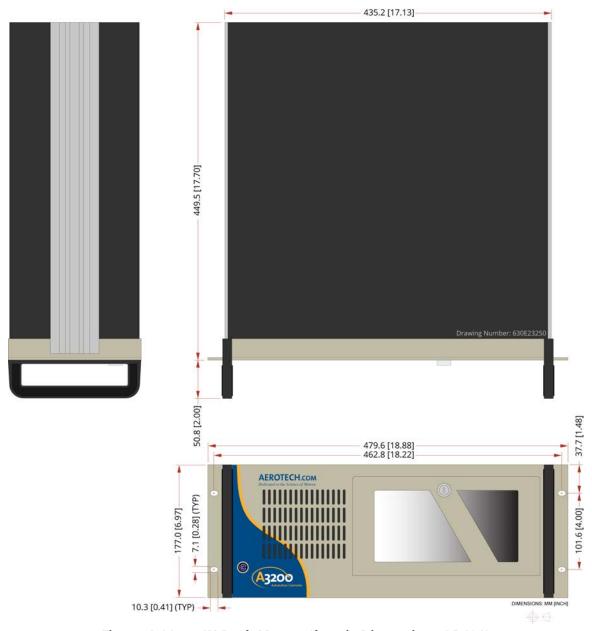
4U Rack Mount Chassis Dimensions (-R401)
